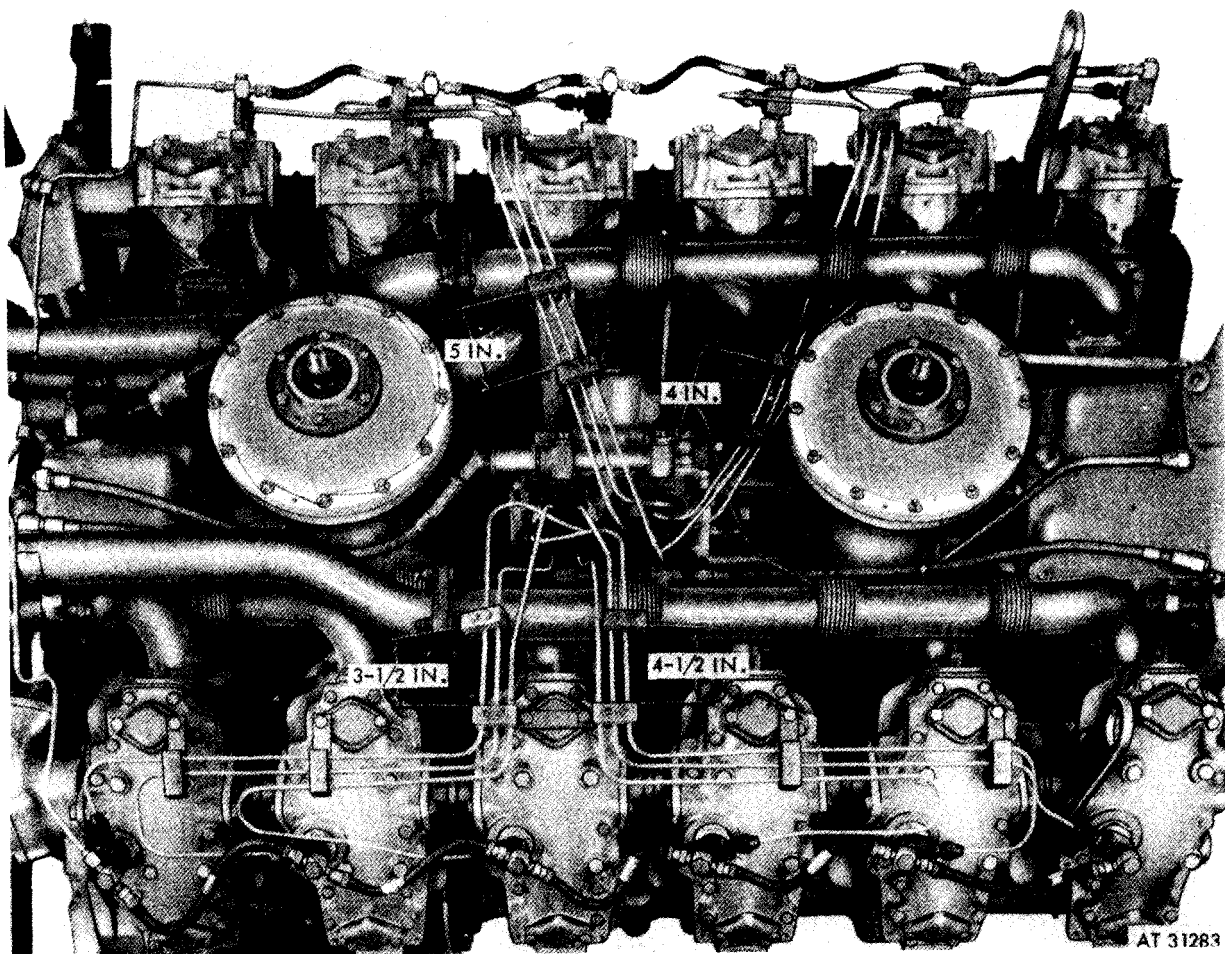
Fuel injector clamps, supports, and tubes-installed view.
